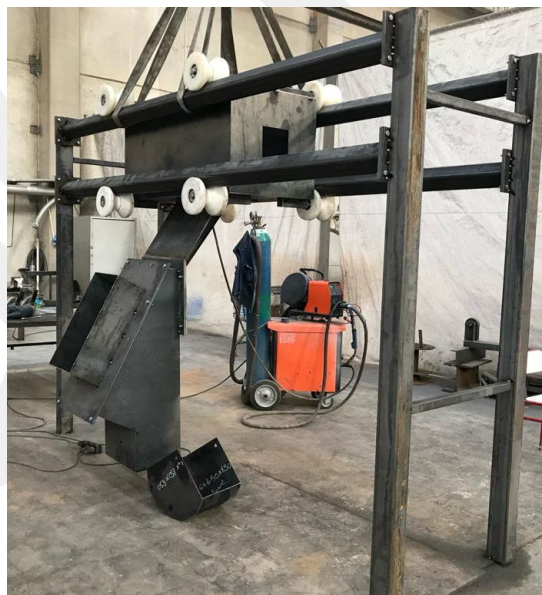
Another view of assembling process of cutter, sample receiver trolley, chute, and steel structure.
